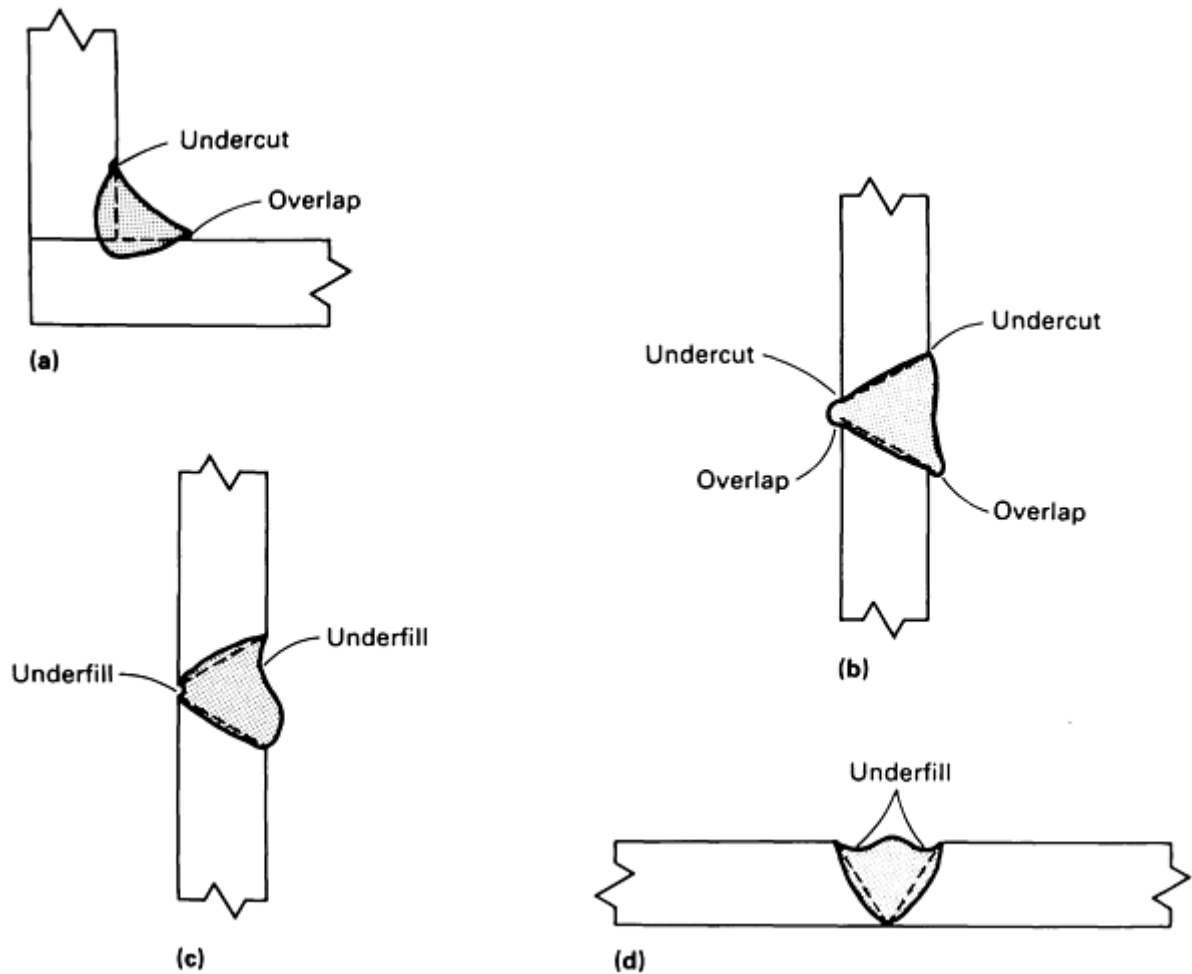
WELD DISCONTINUITIES AFFECTING WELD SHAPE AND CONTOUR. (A) UNDERCUT AND OVERLAPPING IN A FILLET WELD. (B) UNDERCUT AND OVERLAPPING IN A GROOVE WELD. (C) AND (D) UNDERFILL IN GROOVE WELDS
